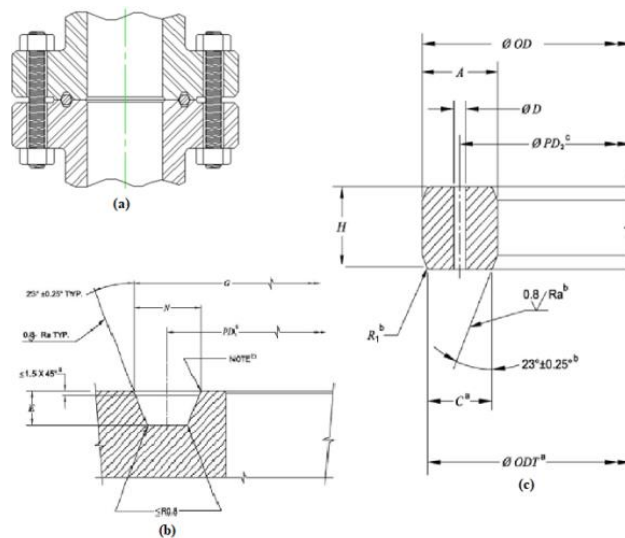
Type BX 160 Ring, (a) Construction of Flange Joint, (b) Cross-section of type BX ring groove, (c) Cross-section of type BX ring gasket [12]
